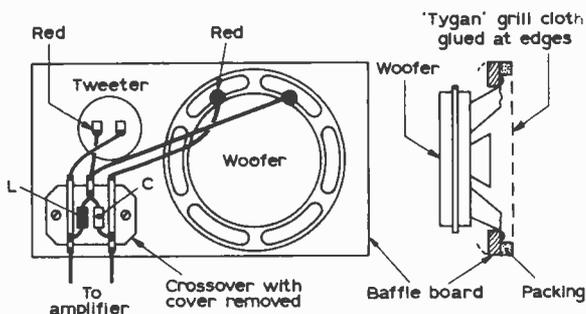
Mounting and wiring of the speakers on the baffle board.
